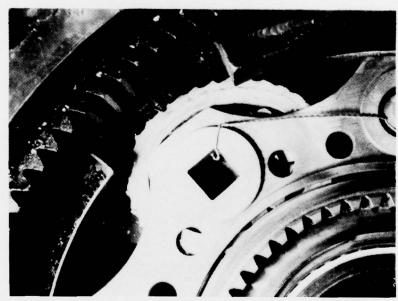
View looking into ring gear case showing debris in lower oil collectors after 54-minute loss-of-lube test of optimized transmission configuration number 2.
